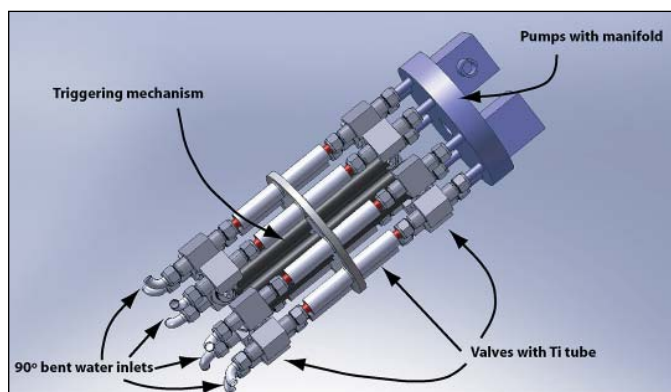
3D representation of one carousel holding eight 50 ml sample containers. A full sampling unit will constitute of three carousels stacked together.
